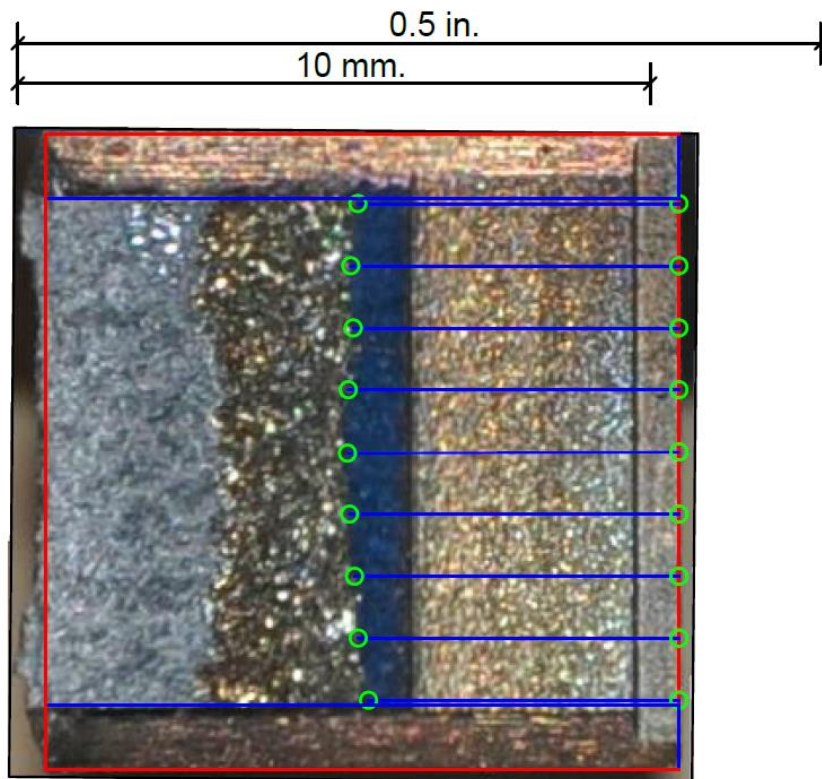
Specimen P15' Fracture Surface
